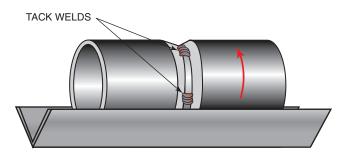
The tack welds are to be evenly spaced around the pipe. Use four tacks on small diameter pipe and six or more on large diameter pipe.
